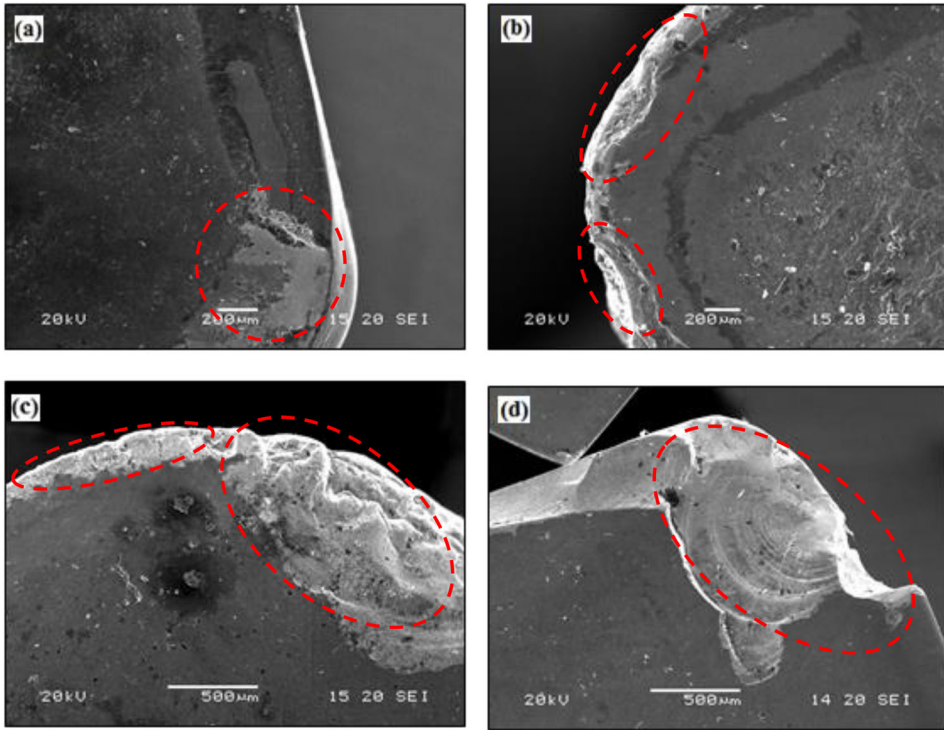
SEM images of drill wear in drilling with (a) carbide drill of workpiece having 45.1% porosity, (b) carbide drill of workpiece having 70.7% porosity, (c) HSS drill of workpiece having 45.1% porosity and (d) HSS drill of workpiece having 70.7% porosity.
